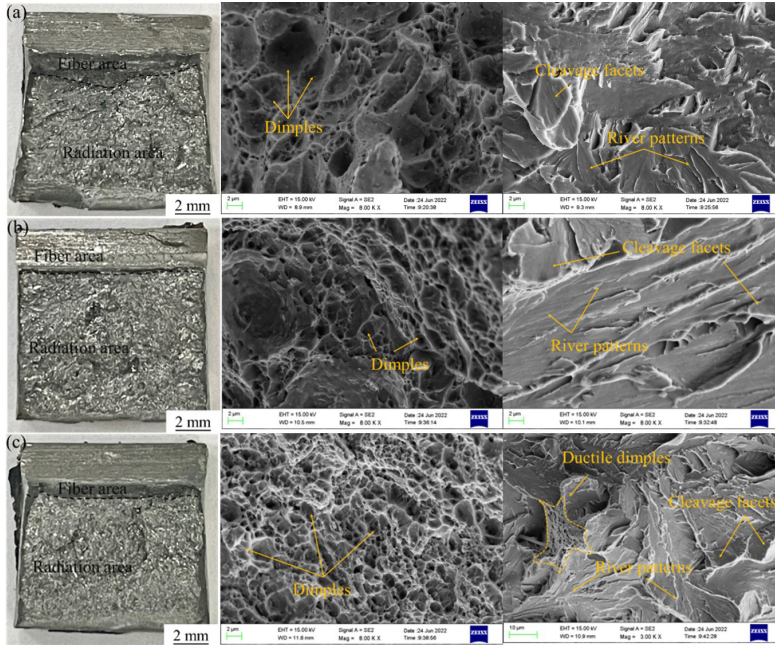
Impact fracture morphology in WM of welded joint: (a) Cover area, (b) Filling area, (c) Root area.
